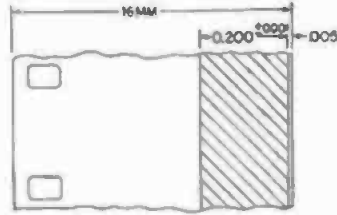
Sound track placement dimensions for 16-mm magnetic film.
